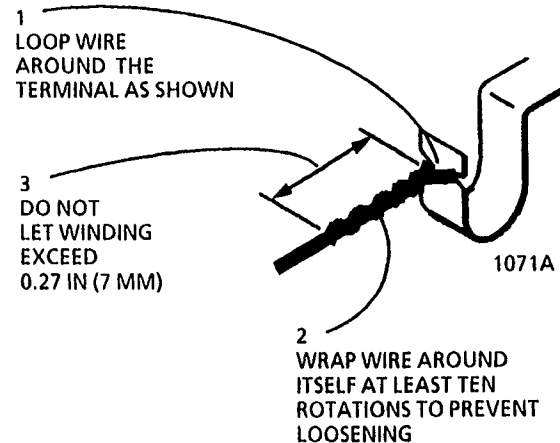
Installing the Transfer Corotron Wire onto the Terminal
